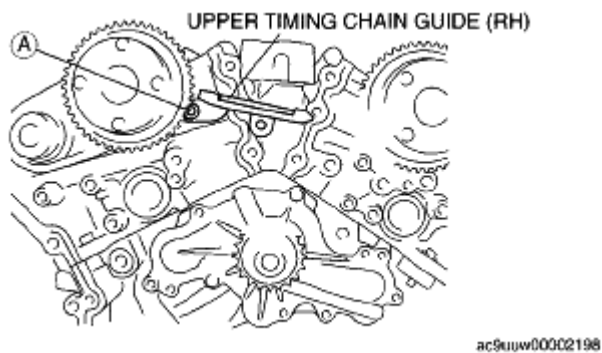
Identifying Upper Timing Chain Guide And Bolts
